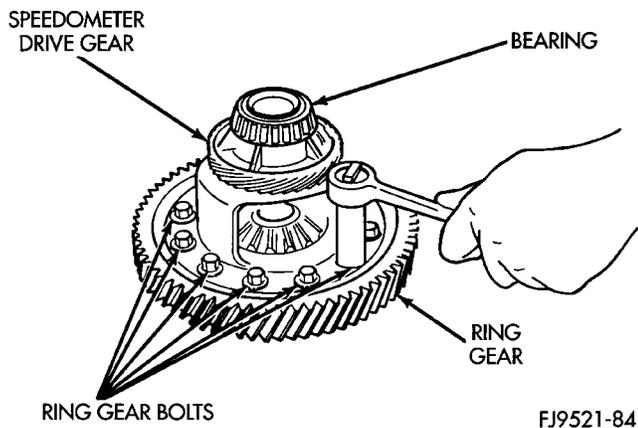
Remove or Install Ring Gear Bolts and Ring Gear
